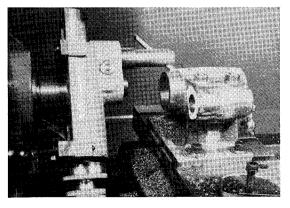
Below. Boring the .500 in. dia. hole in the tailstock before machining the main spindle bore.
